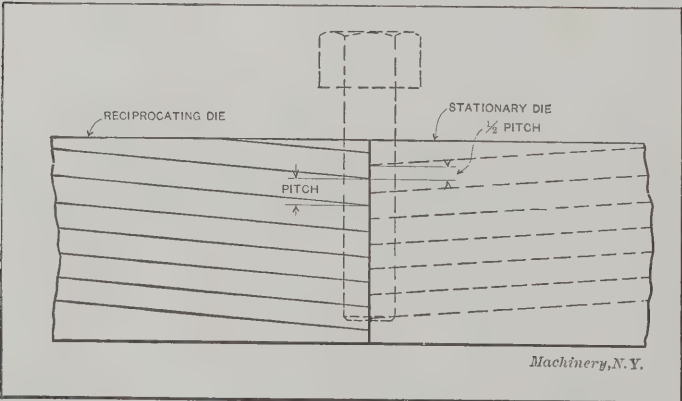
Diagrammatical View showing the Relative Positions of the Thread Rolling Dies when starting to roll a Thread
